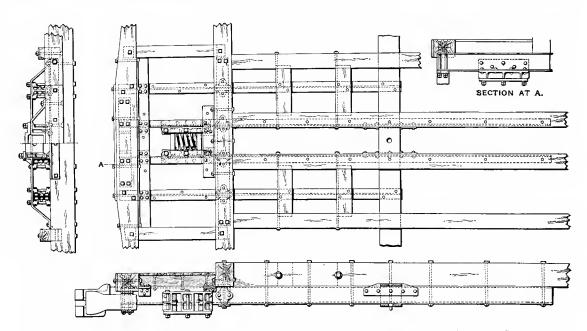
Standard Steel Platform, Type C, for Caboose Cars. Standard Coupler Company.
